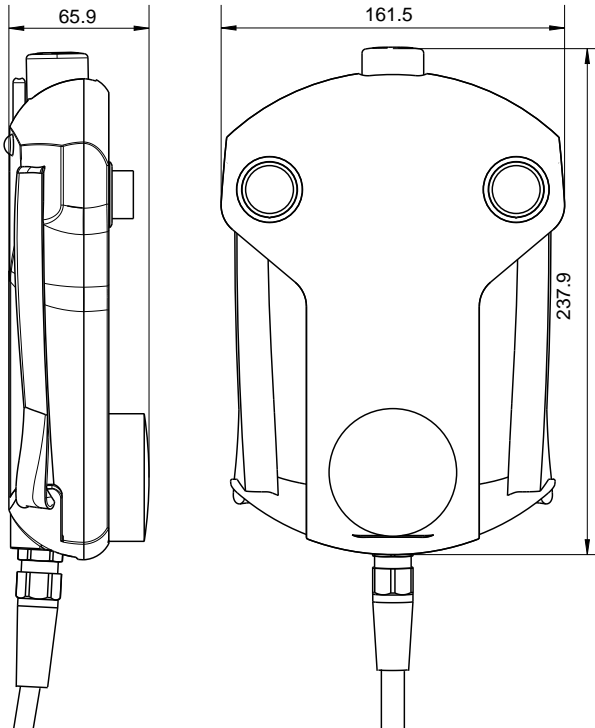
Dimensions (in mm) of the hand-held terminal VCH 05.1
